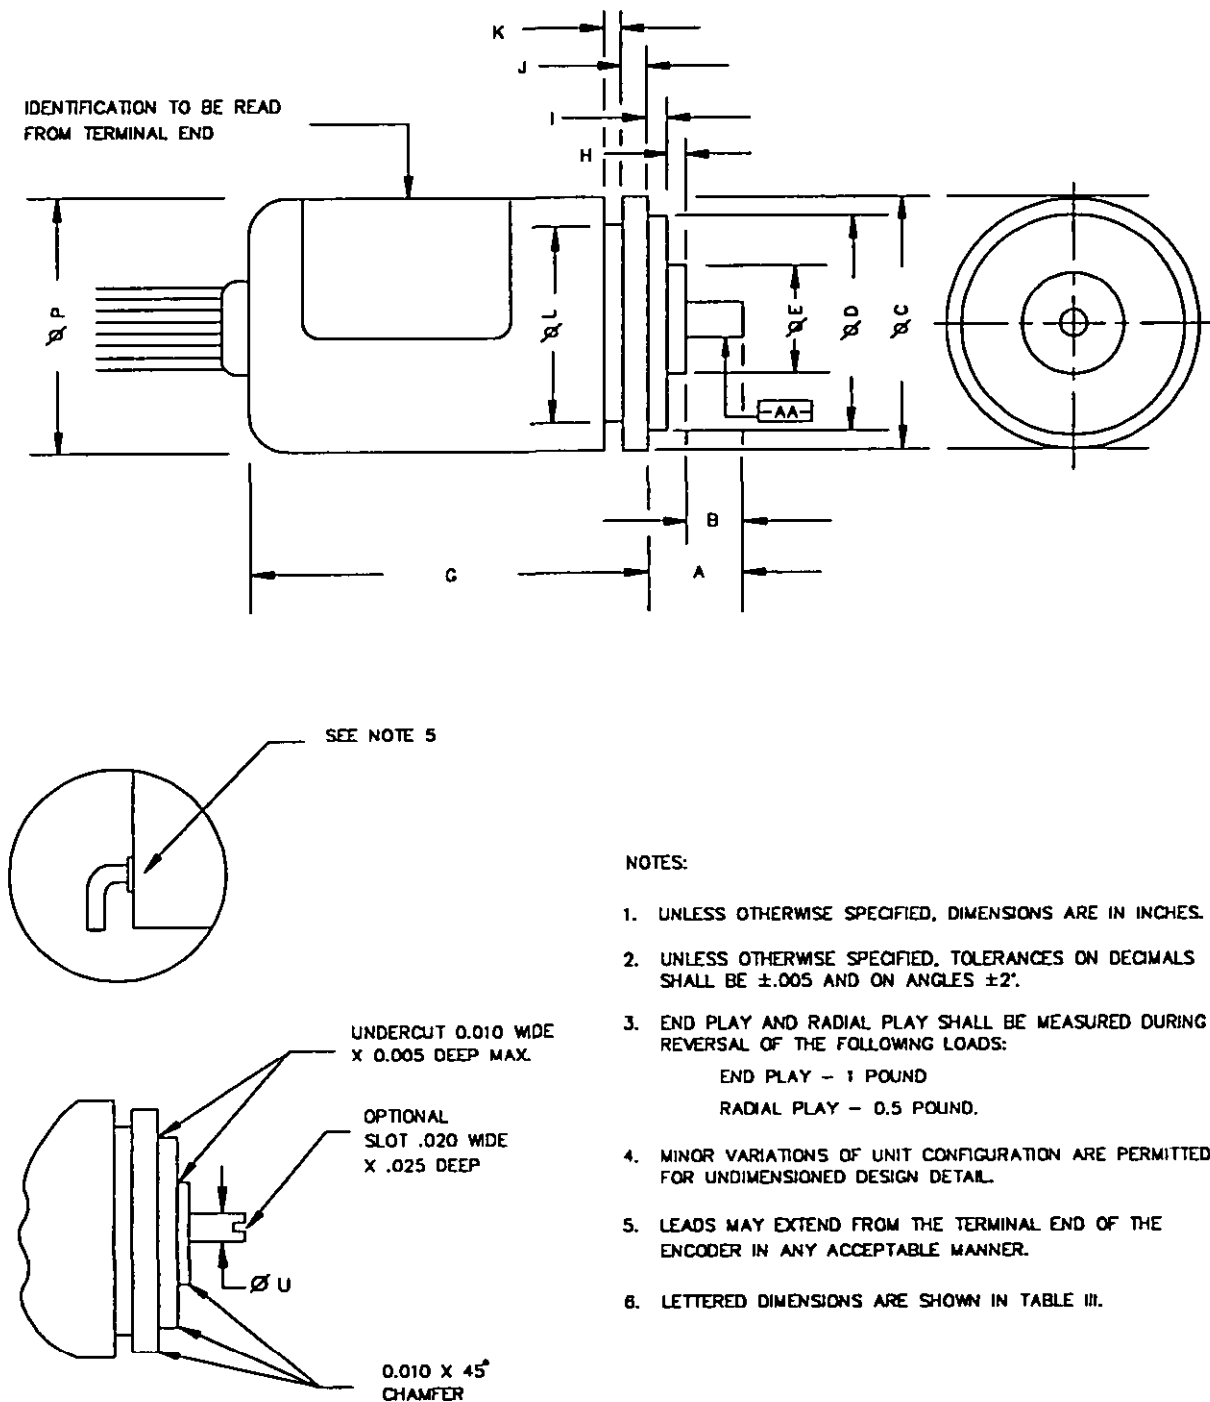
Outline drawing for sizes 08 and 11 shaft to digital encoders (synchro mount).
